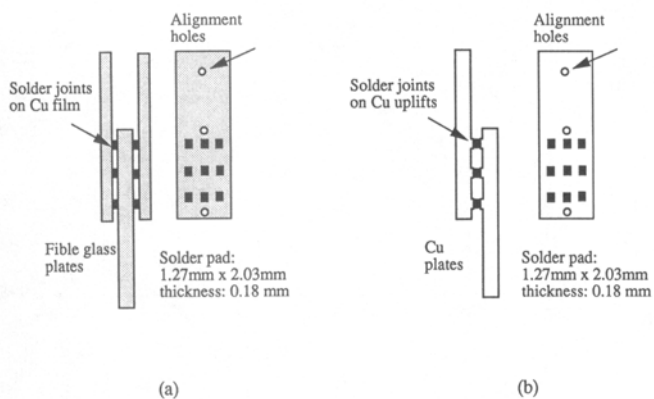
(a) double-shear and (b) single-shear specimens for creep and fatigue tests of solder joints, respectively.
